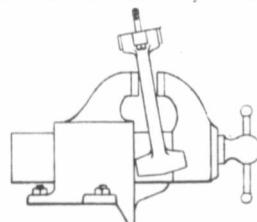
Showing the wrong way to clamp a connecting rod in a vise.
